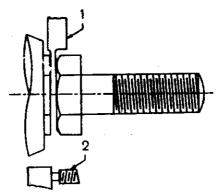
Setting of parting off tool 1. Parting off tool, 2. Position of stop rod.
